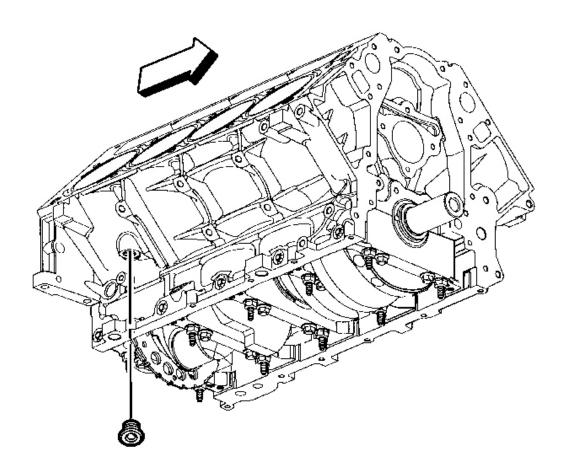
Identifying Plug Location On Underside Of Block Courtesy of GENERAL MOTORS CORP.
